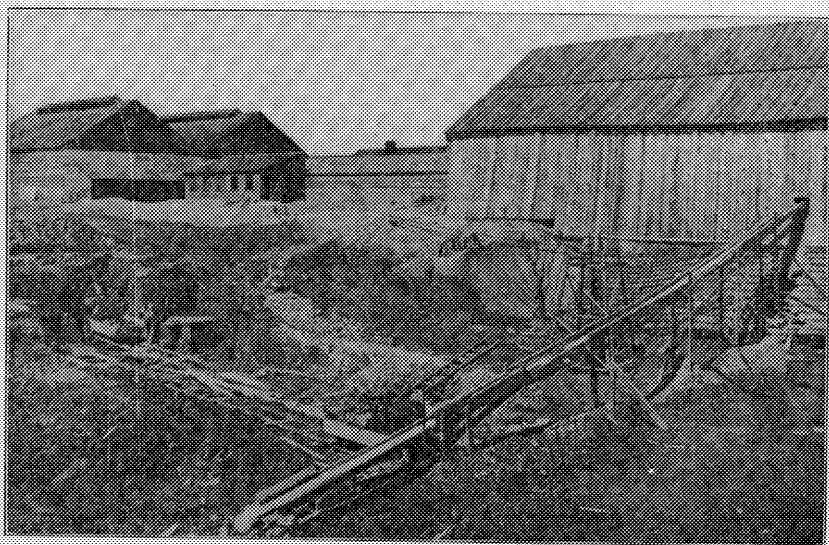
Conveyor at Detroit Roofing Tile Co.,
